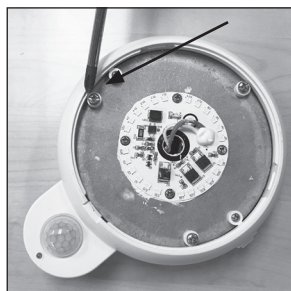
A: Remove the Screws that hold the Mounting Base Plate to the Luminaire
